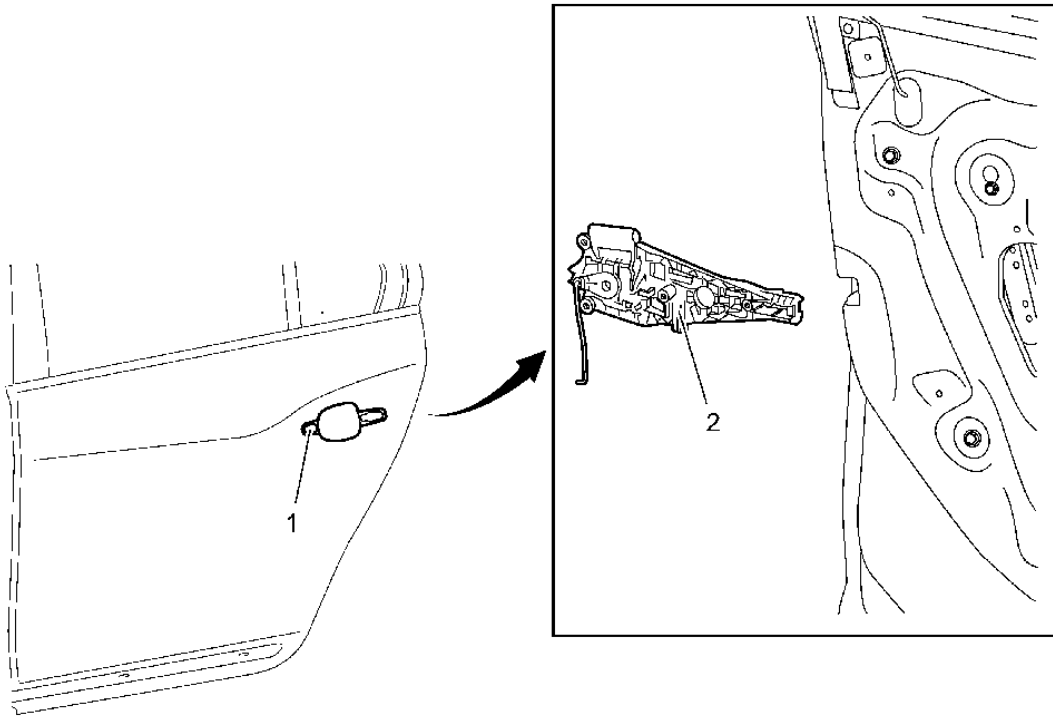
Rear Side Door Outside Handle Bracket (Passive Entry Passive Start)
